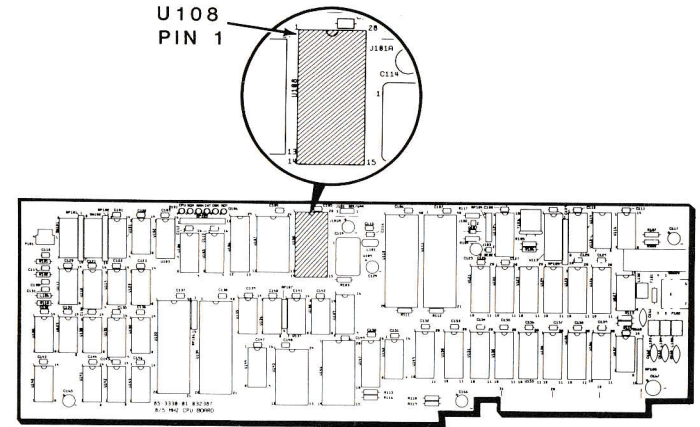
CPU Card (PCB Part No. 85-3330-XX)
